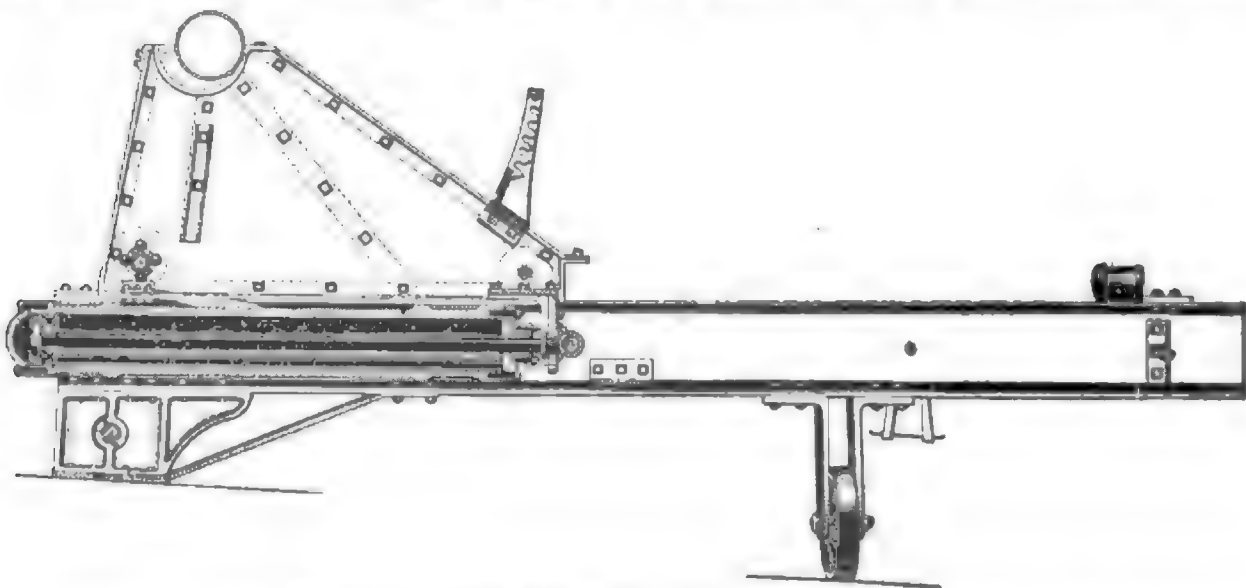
U. S. IRON BARBETTE CARRIAGE FOR 8-INCH RIFLE.
